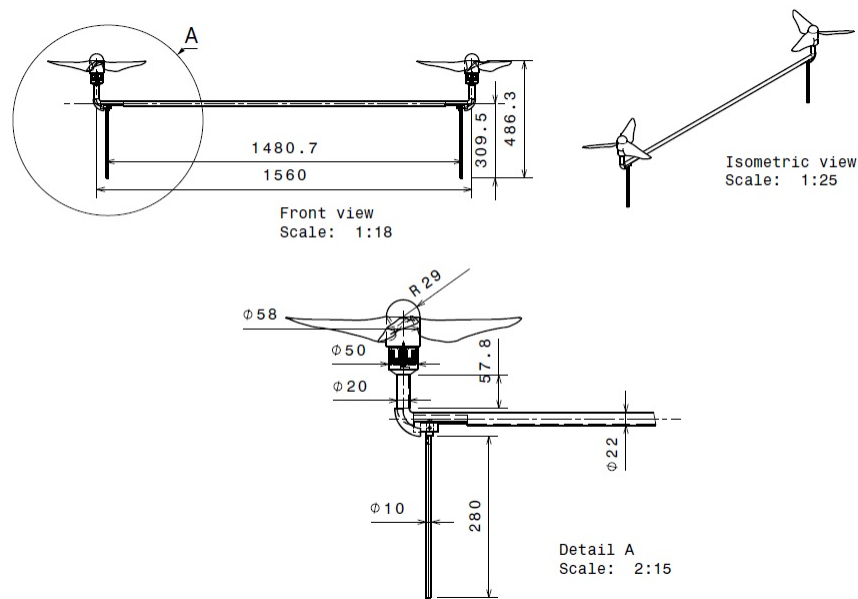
Technical drawings of the landing gear including propulsive system (dim. in mm)
